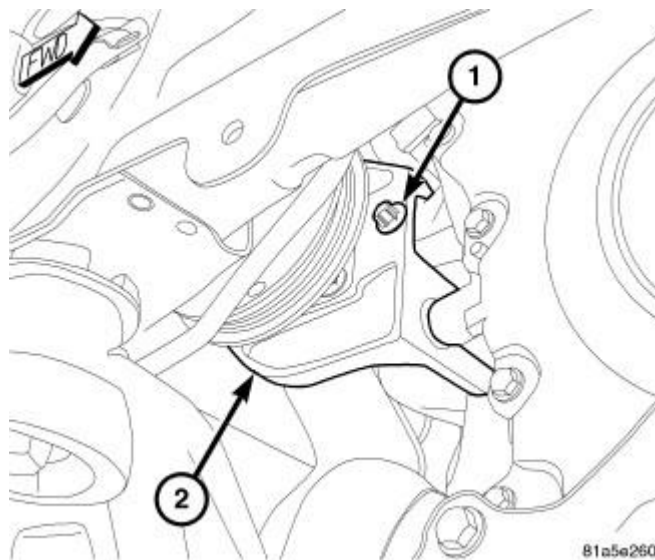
FRONT PUMP MOUNTING BRACKET BOLTS - 2.7L
